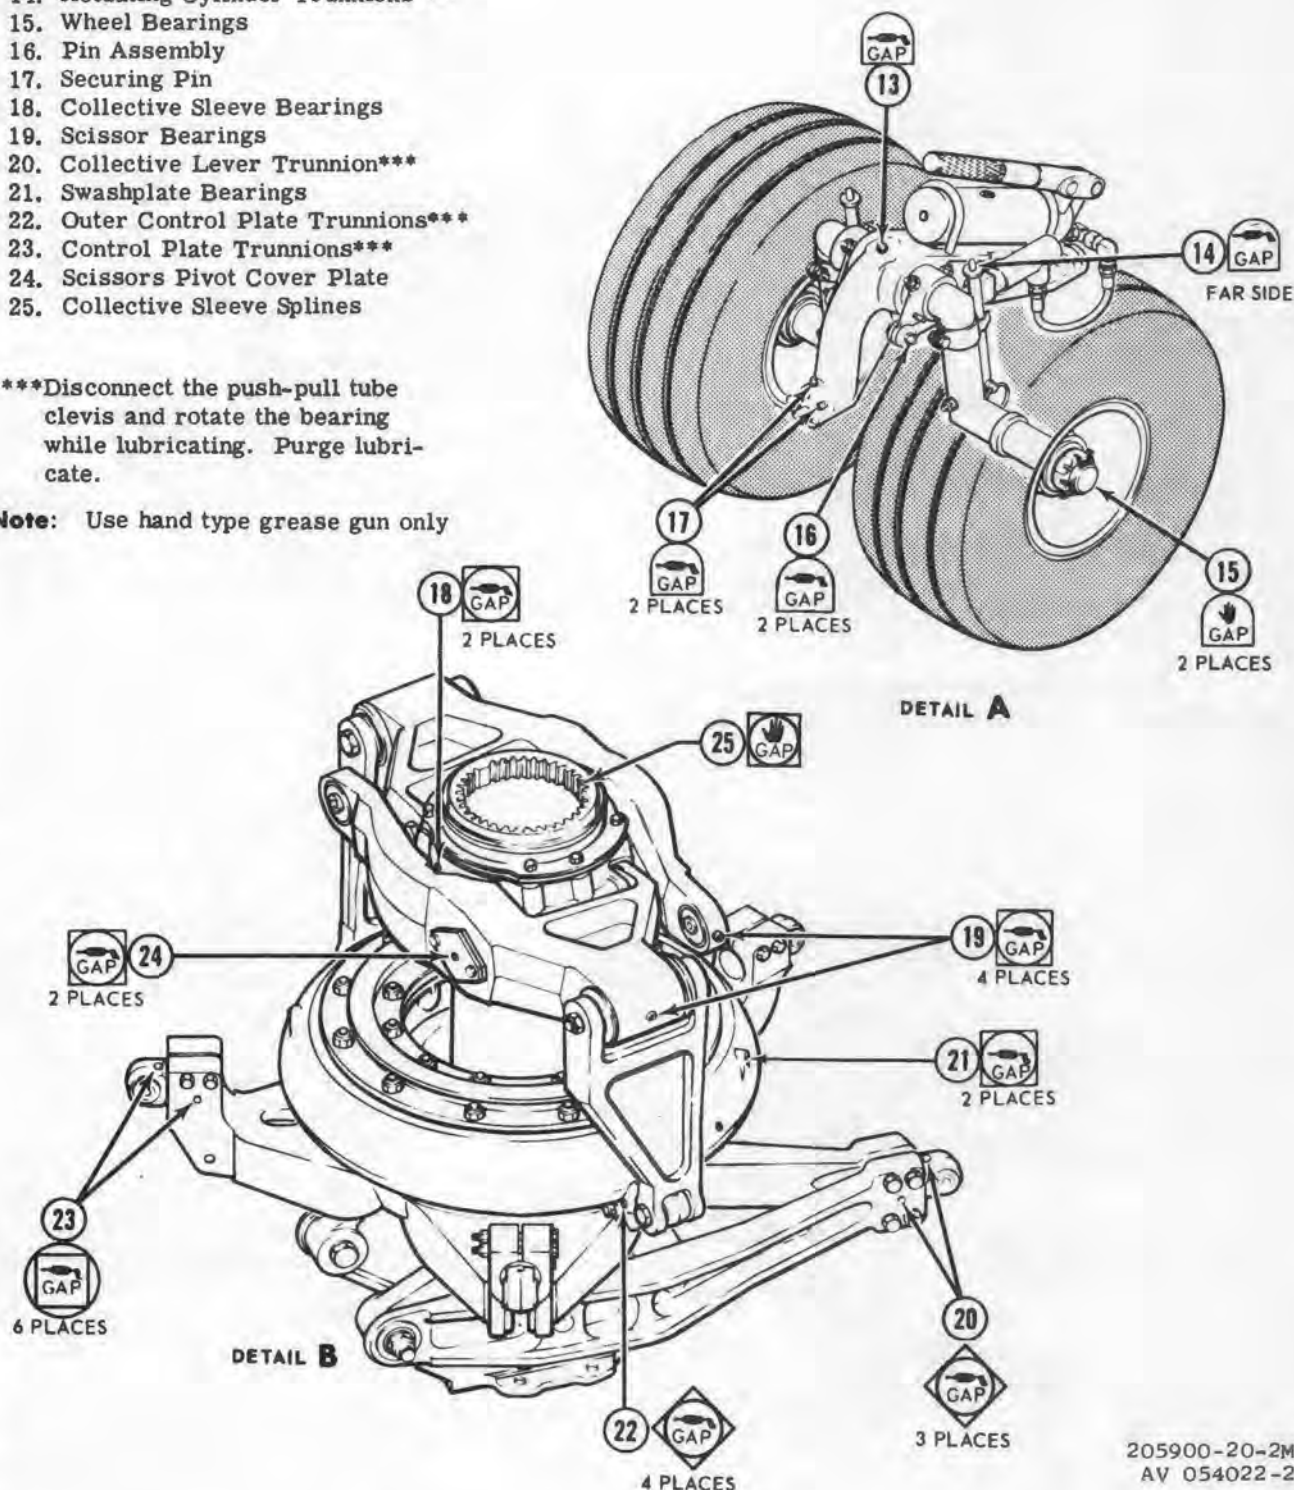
Lubrication chart (Sheet 2 of 3)
